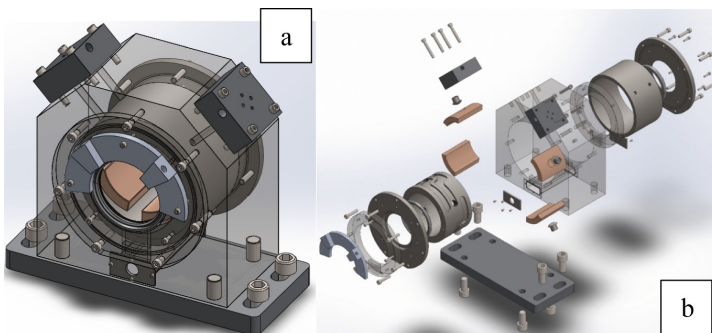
Mechatronic Fluid Pivot Journal Bearing. a) Assembled. b) Exploded.
